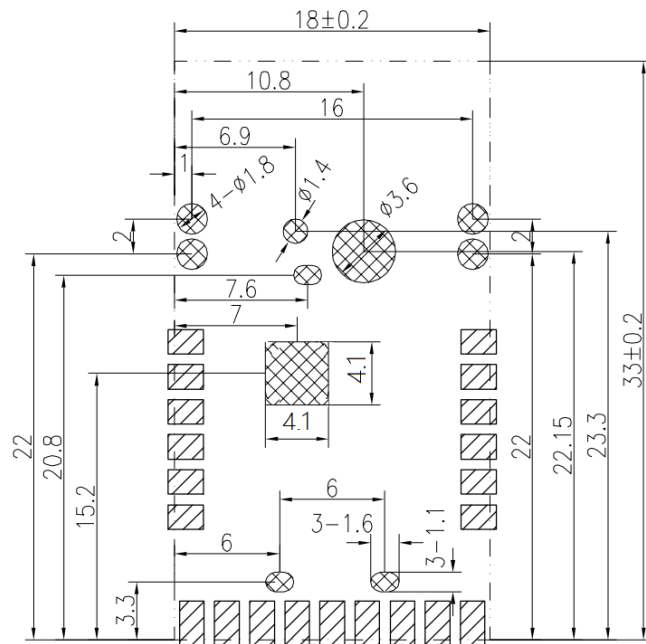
Stamp hole package size (no mounting pad, unit: mm)
